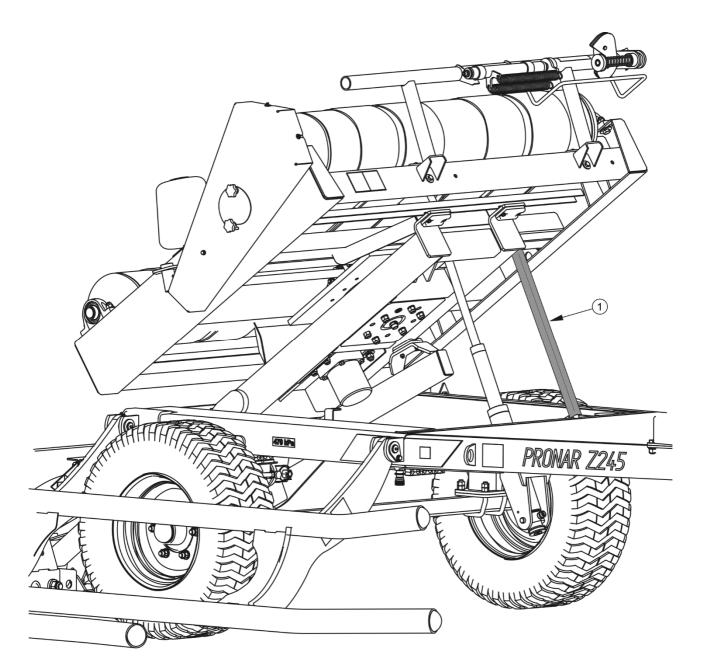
Preparing of the wrapper for adjusting the table drive chain
